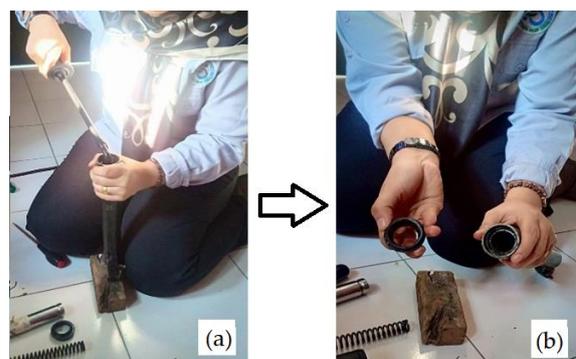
Photographic view of product testing by the author: the process of removing seal (a) and removed seal (b)
